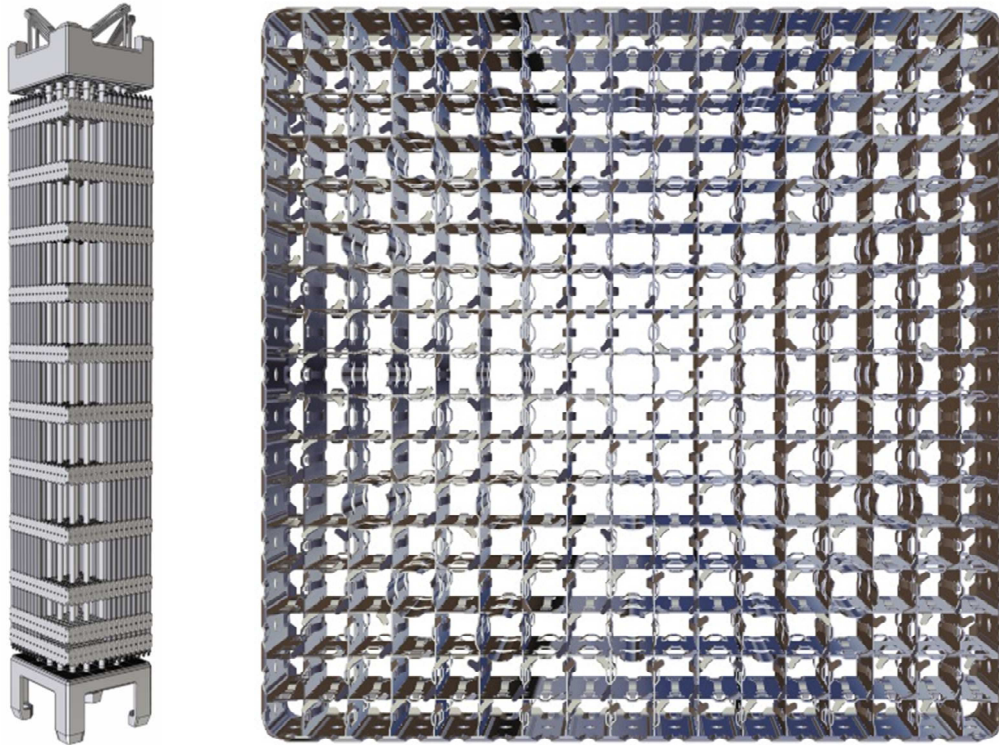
Fuel assembly and mixing grid that have inspired the geometry of the generic FA model
